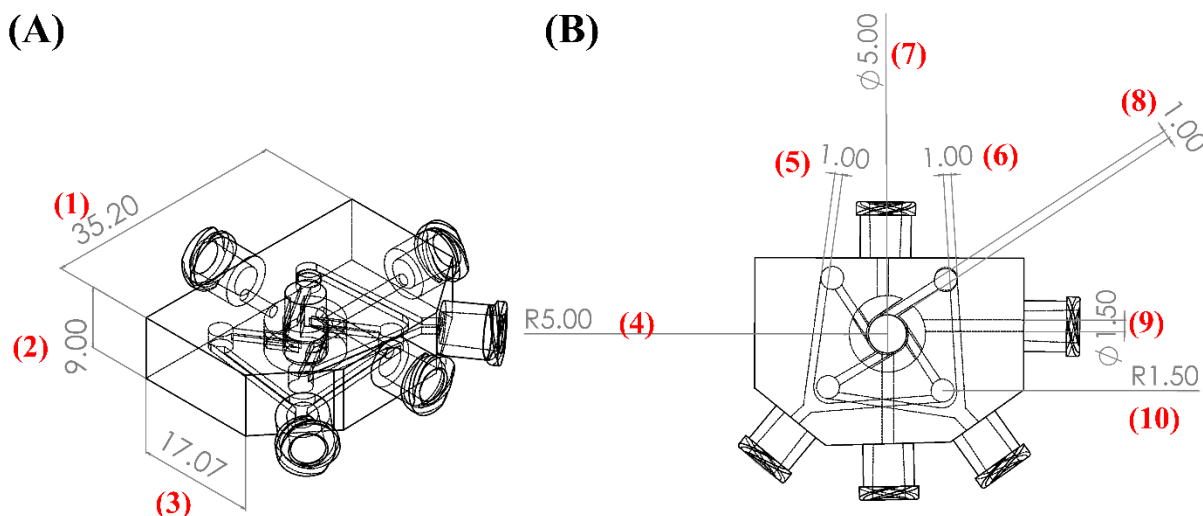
(A) Isometric view and (B) top view of the jacketed microfluidic mixer device with marked dimensions.
